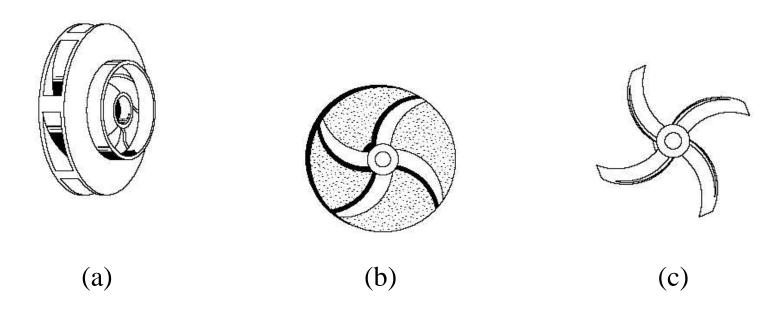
Impeller blades type; Closes, (b) semi-closed, (c) open.
